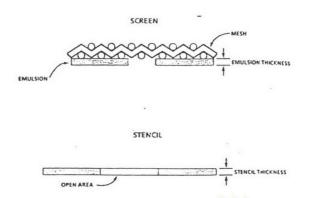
Cross-sectional views of stencils and screens for solder paste printing.⁶
